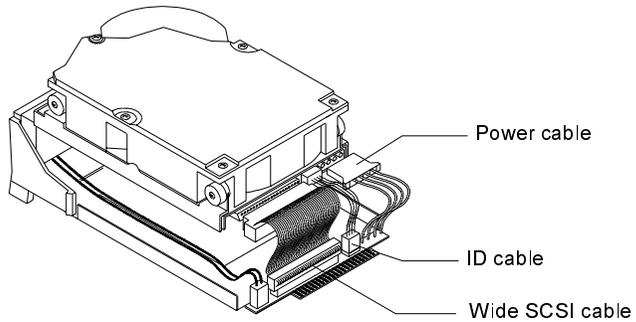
Connecting the Drive Cables (wide SCSI drive)
